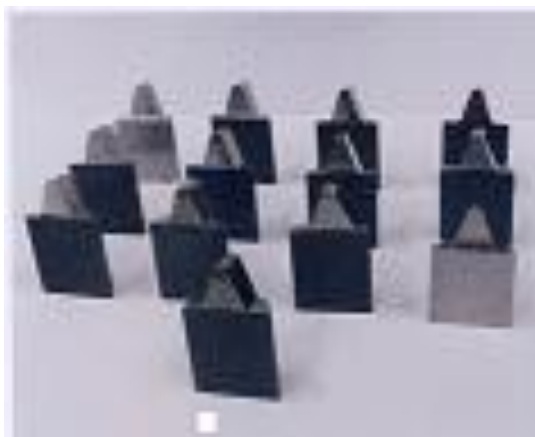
Uncoated worn-out model hob milling tools with the module $m = 5$
